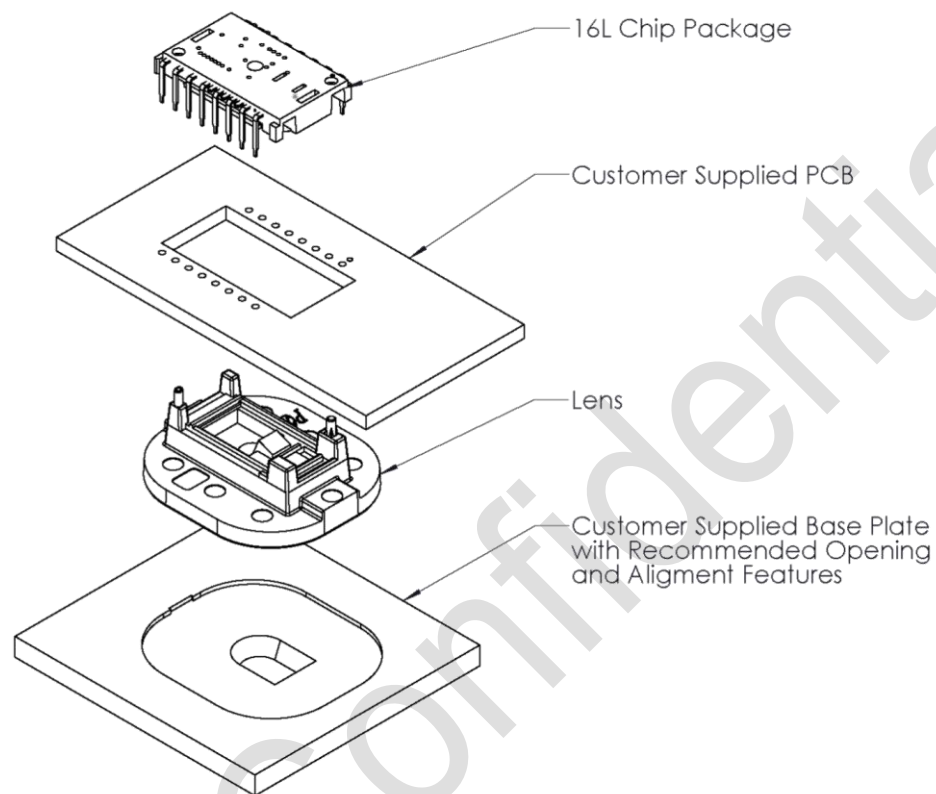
Exploded View of Assembly with LM19-LSI Lens
